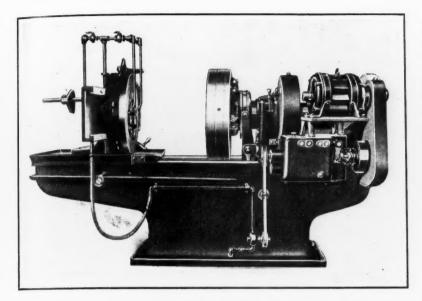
Arrangement of Motor Drive and Gear-box on New Landis Machine
